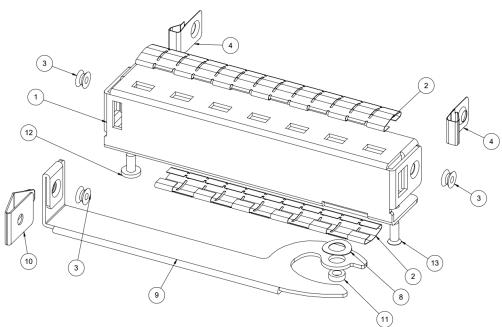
Small Card Generic I/O Bracket with a Latching Lever (3D View)
